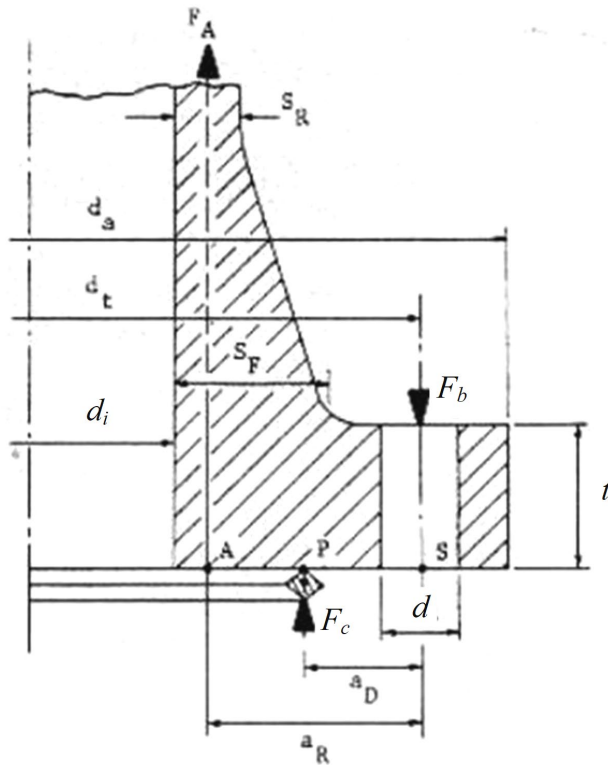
Dimensions of a Fixed Circular Flange (with a Weldneck)
